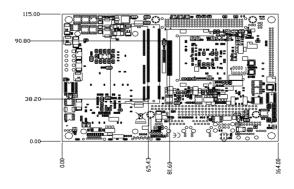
PCM-4386 Mechanical Drawing (Solder Side)
